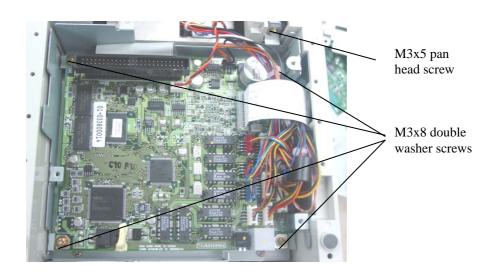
Assembly of connectors to the Check Scanner Main PC Board
